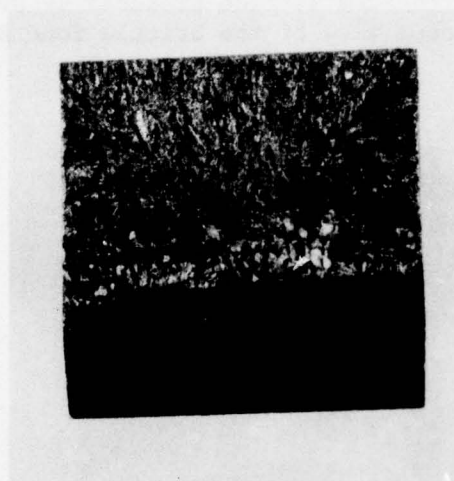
Optical macrograph of fracture surface of Specimen A-11
